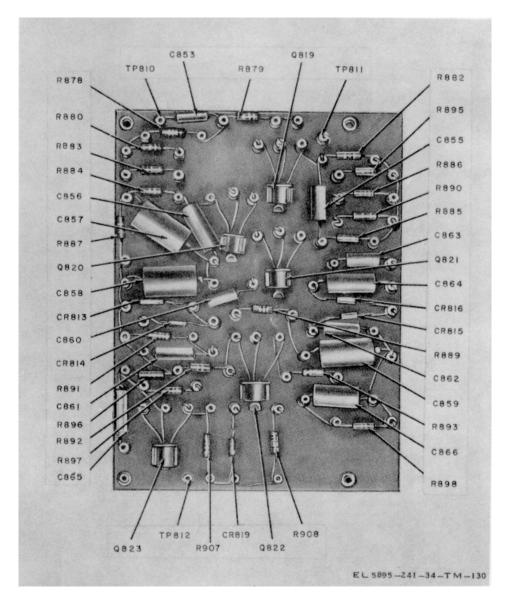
Amplifier Assembly AM-2827/FSW-8, terminal board TB804, parts location.
